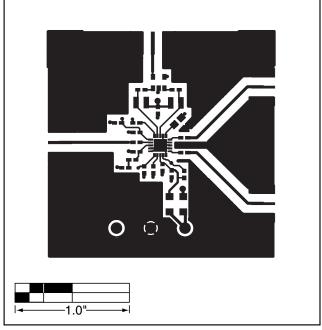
MAX9993 EV Kit PC Board Layout—Top Layer Metal
